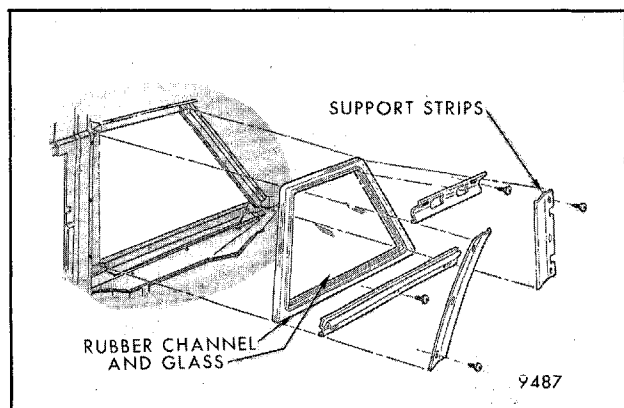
Inside Loaded Quarter Window and Rubber Channel - "B" Styles Typical
